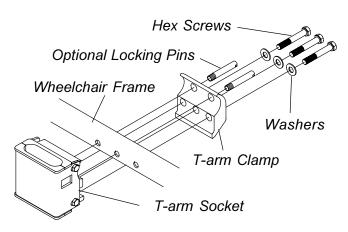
INSTALLING THE T-ARM SOCKETS
